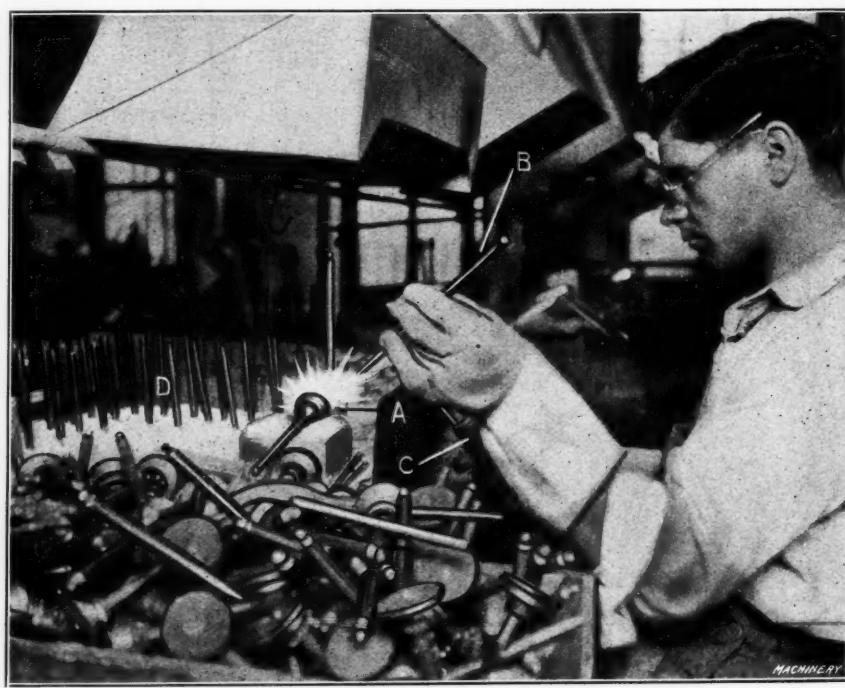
Close View of Welder at work applying Cast Iron to Poppet Valve Heads by Autogenous Welding
